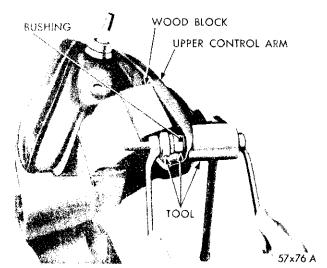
Removing Upper Control Arm Bushing (Typical)
